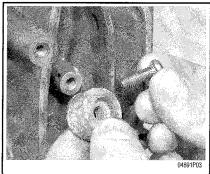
Most anodes are easily removed by loosening and removing their attaching fasteners
